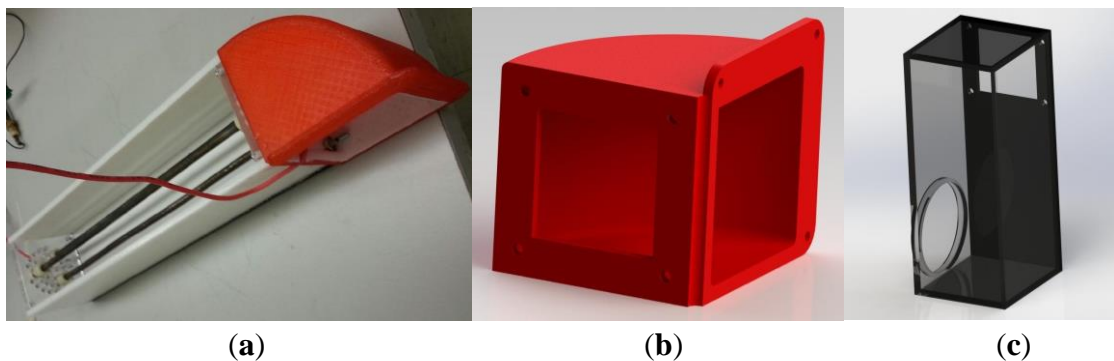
(a) Heating element, (b) SolidWorks drawing for the vent, (c) Reheater.
